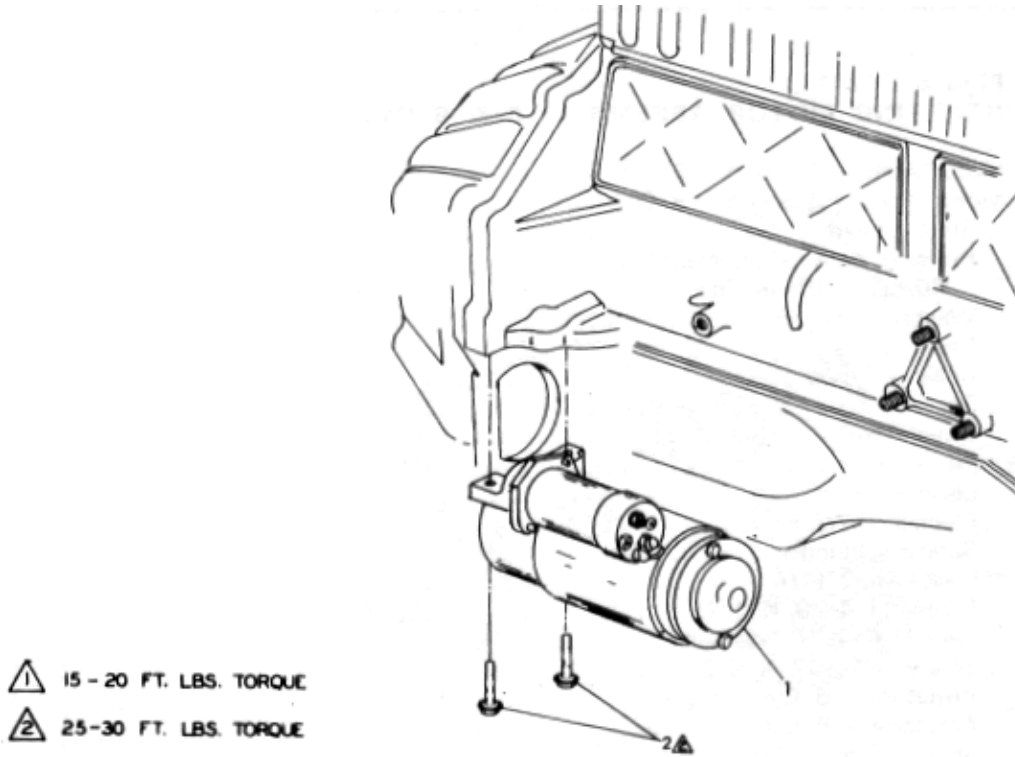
Starting Motor Mounting, 6 Cylinder
